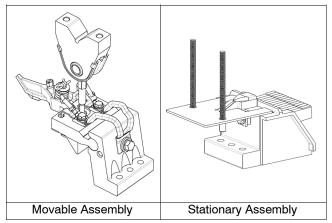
Main and Arcing Contact Assemblies (a 3 pole switch has 12 of each assembly)
